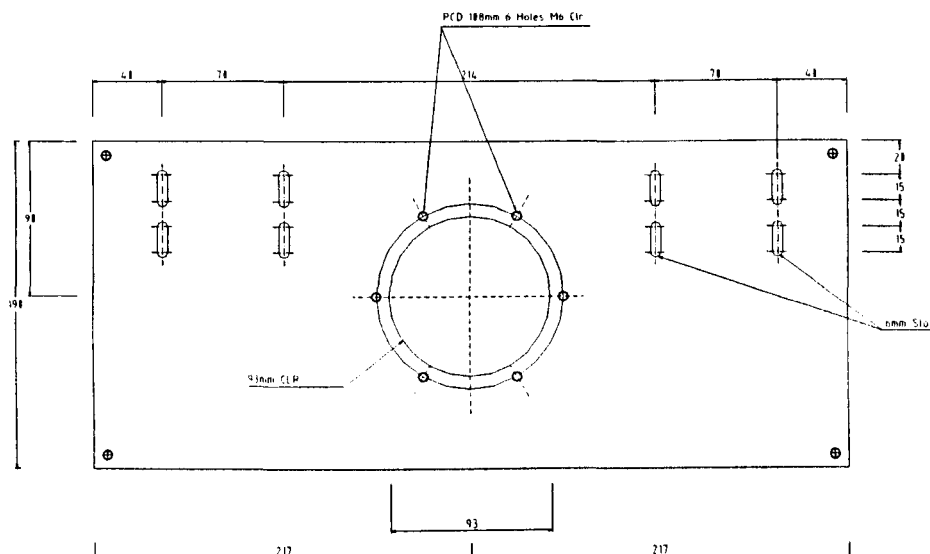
Dimensions and Layout of Manifold Design for both CC-25 and CC-75
